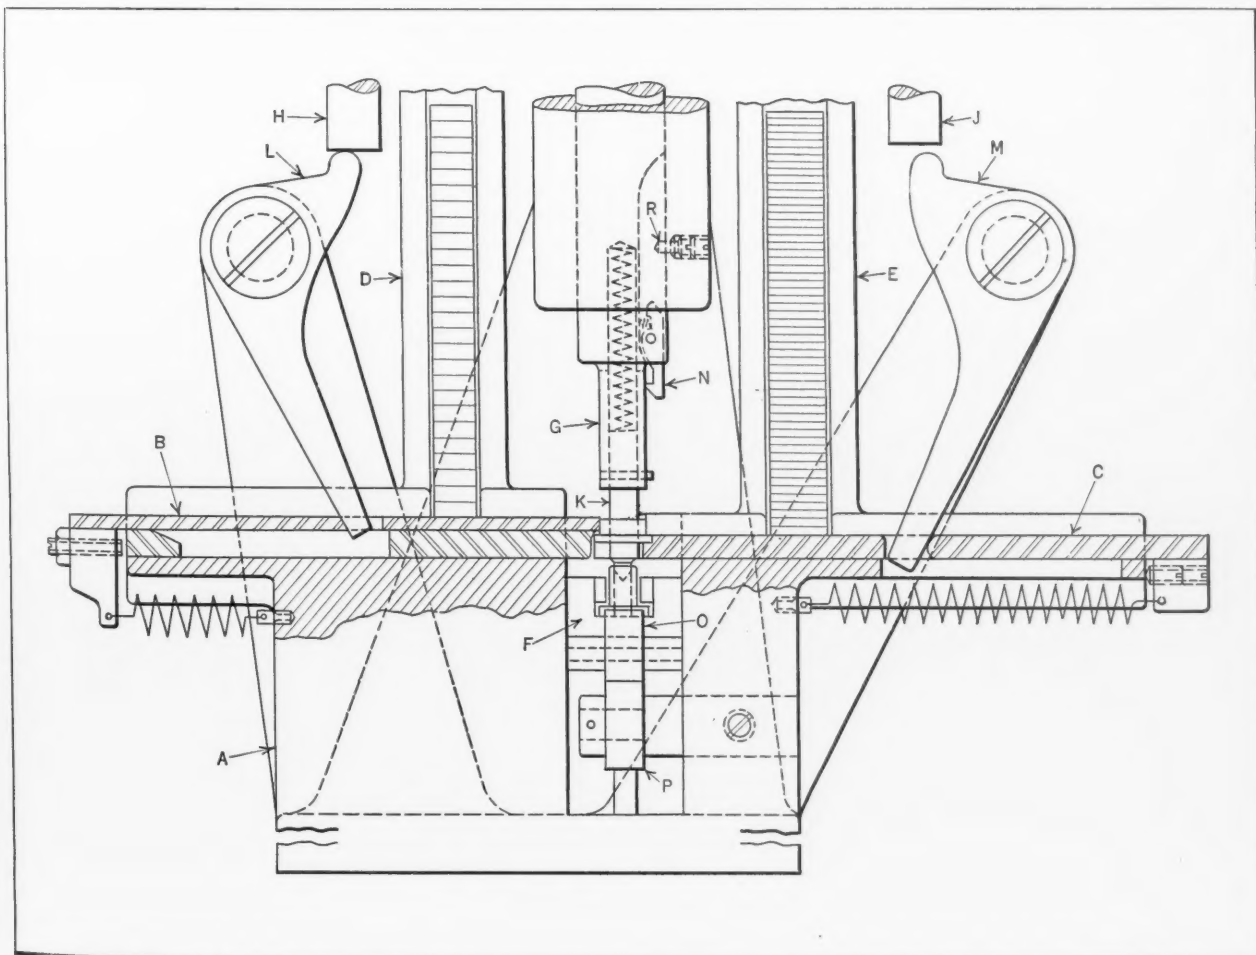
Fixture Equipped with Two Magazines and a Hopper for Automatically Assembling Washers A and B on the Bushing Shown in Fig. 1
